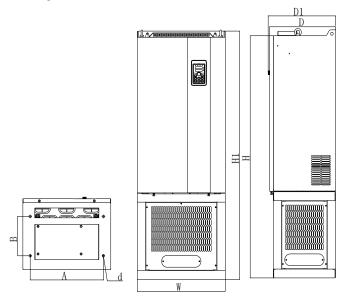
160kW~220kW G3 (Base with DC reactor) Outline dimension
